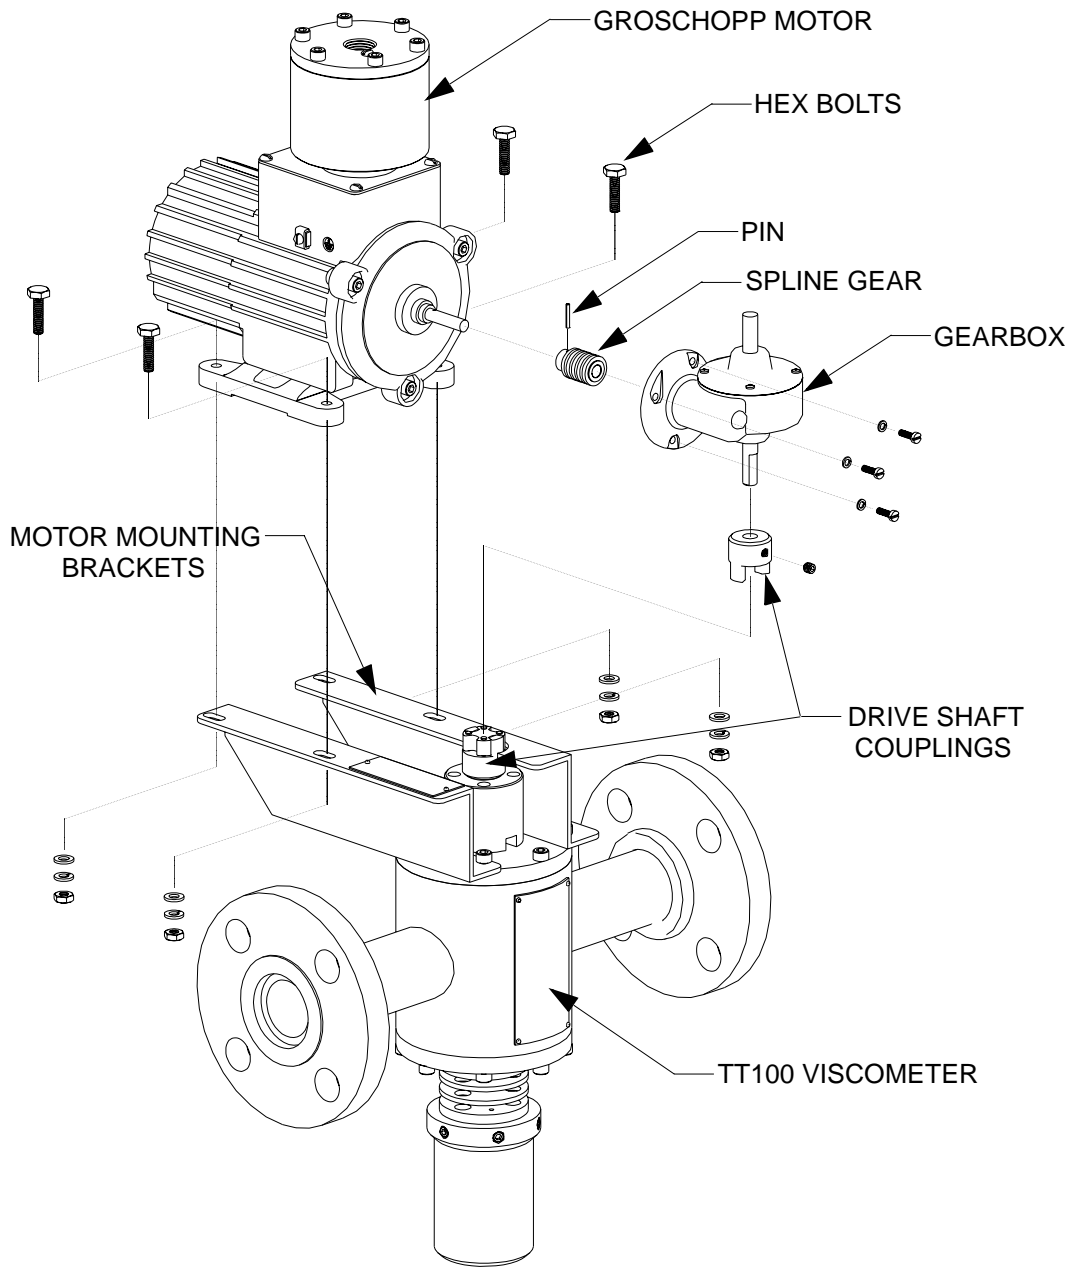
Groschopp Motor and Gearbox Disassembly
